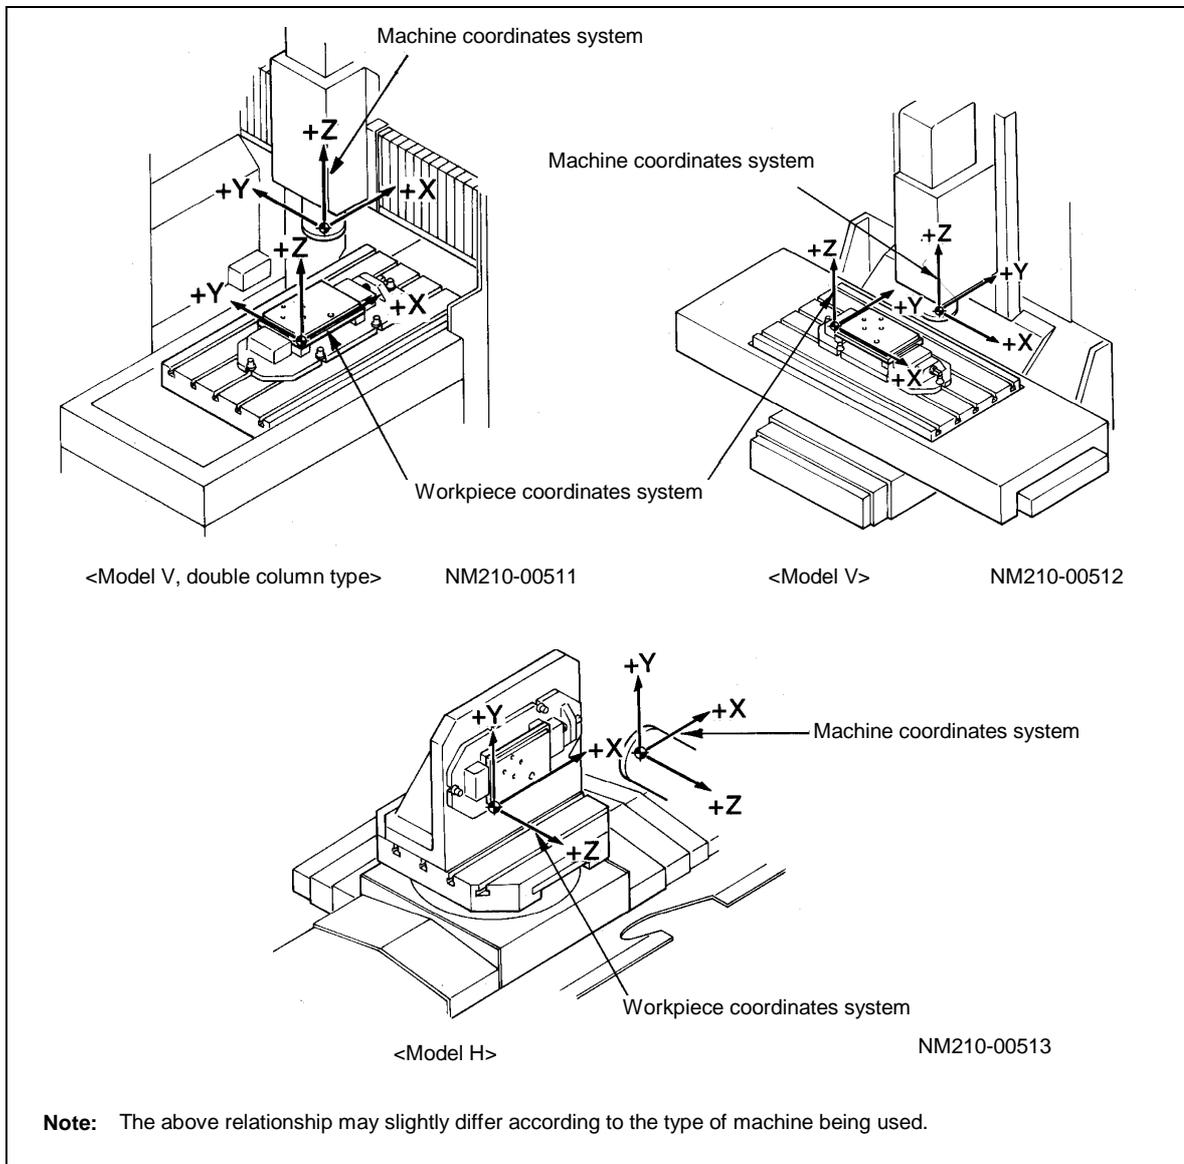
Machine coordinates system and workpiece coordinates system
